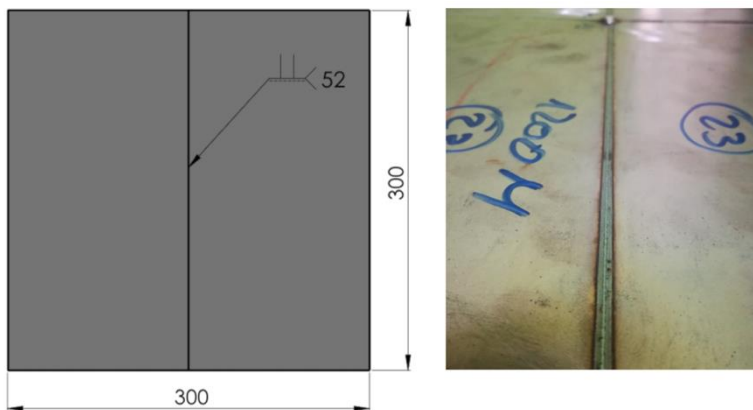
View of a butt weld between Docol 1200M sheets
